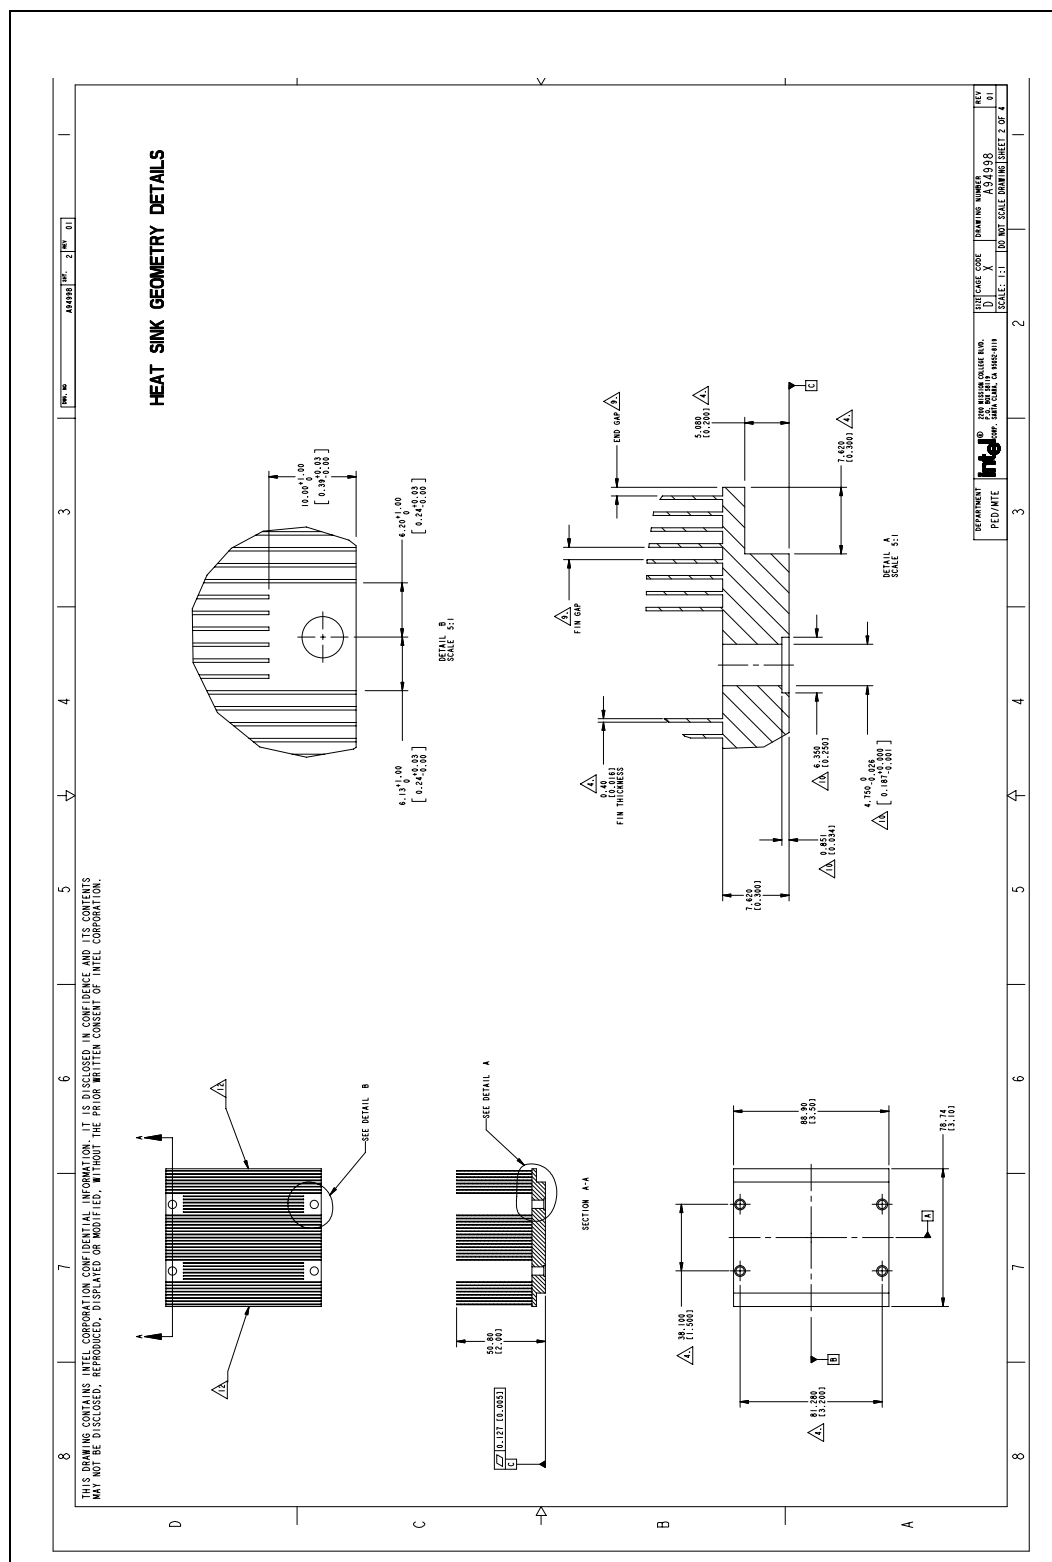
2U CEK Heatsink (Sheet 3 of 4)
